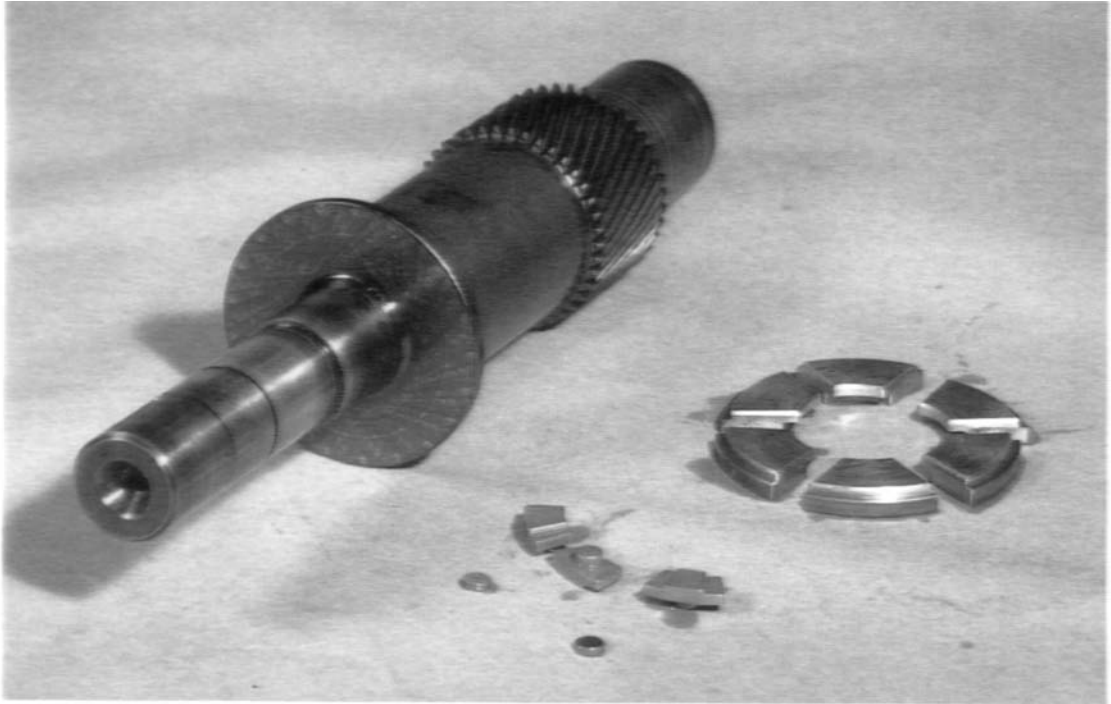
Thrust Shoes, Leveling Pads and Adjustment Pads
